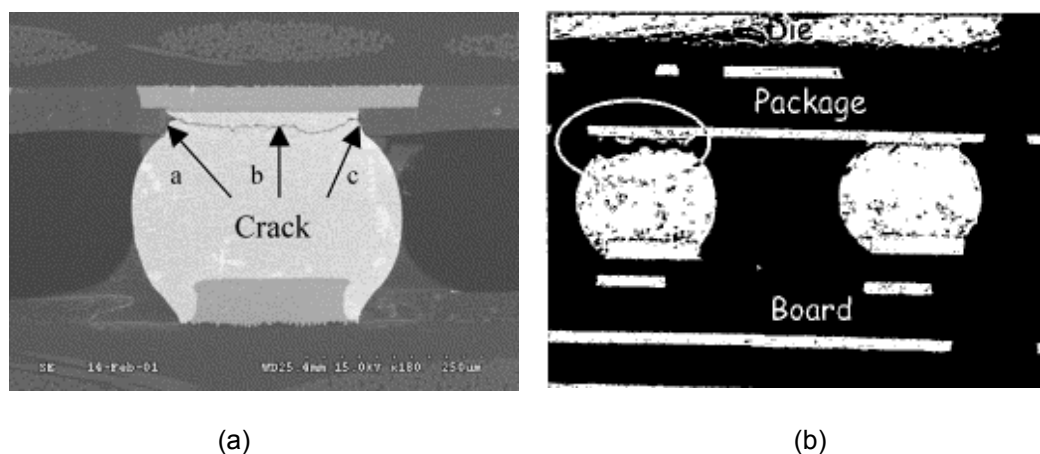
(a) Solder joint fracture at the substrate side (Wu et al., 2002); (b) solder joint cracks and pad cratering (Mercado et al., 2004)
